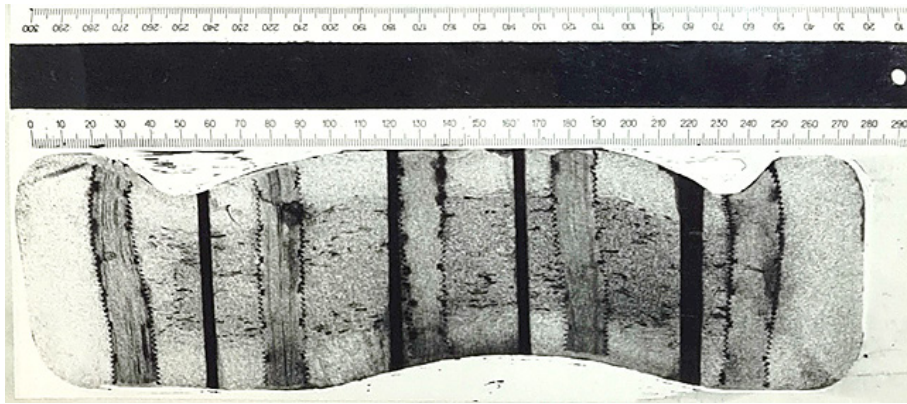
Location of “witnesses” after the 1st pass, 1...5 - location of screws.
